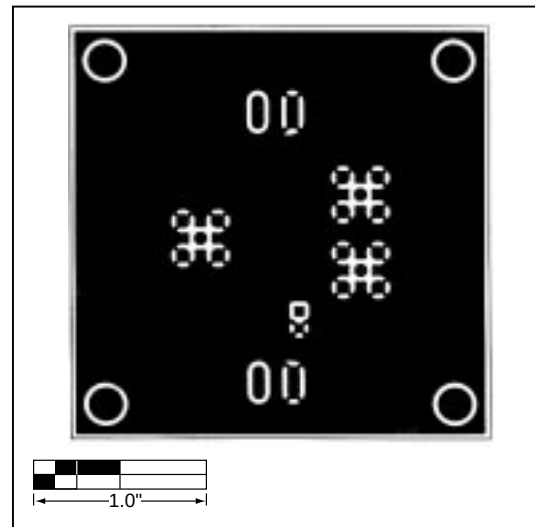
MAX4447 EV Kit PC Board Layout—Solder Side
